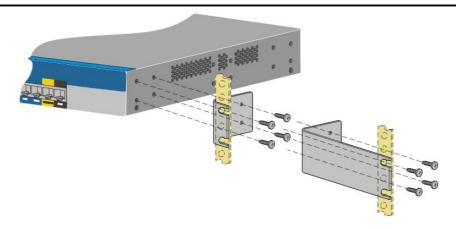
Bracket installation for front mounting on a 19- or a 23-inch rack
